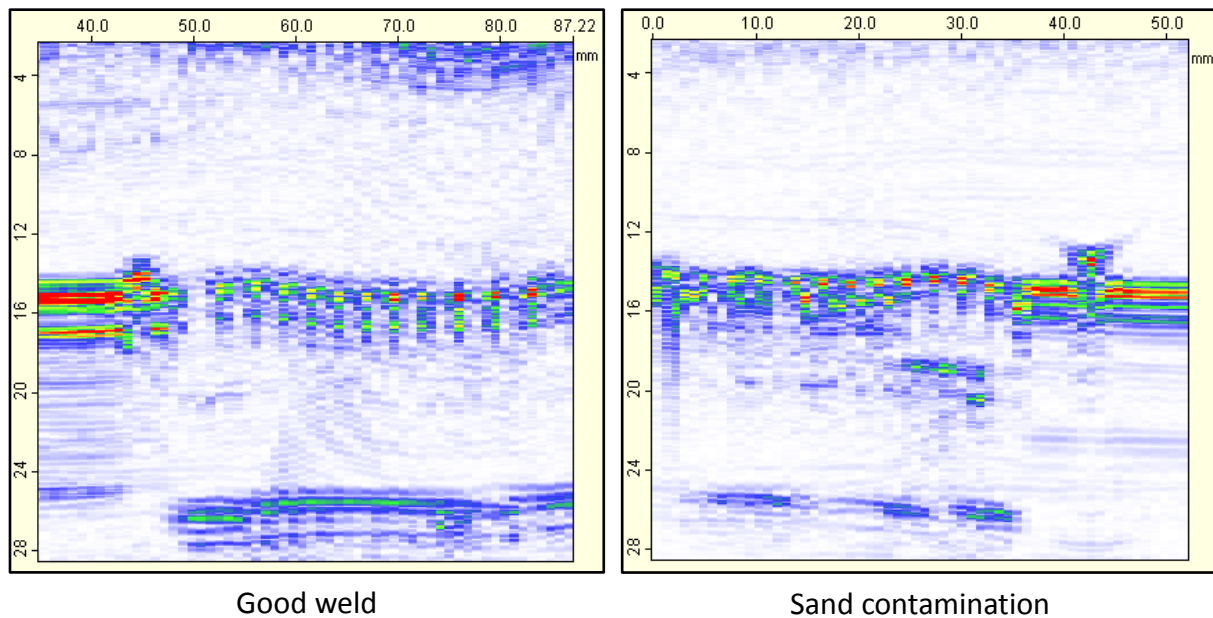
Comparison of ultrasonic images of a good weld and a sand contaminated weld in 110mm EF joints at E.ON Ruhrgas.
